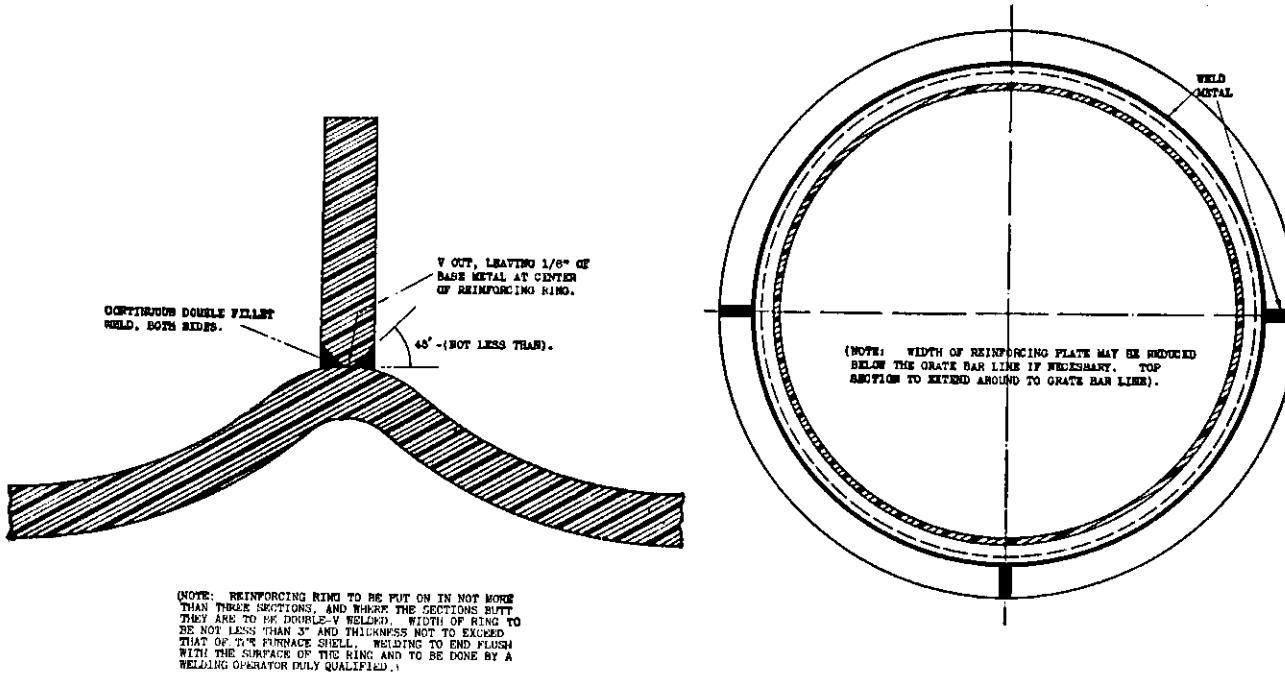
(e) —Approved method of reinforcing furnace crowns by means of arc or gas welding.
